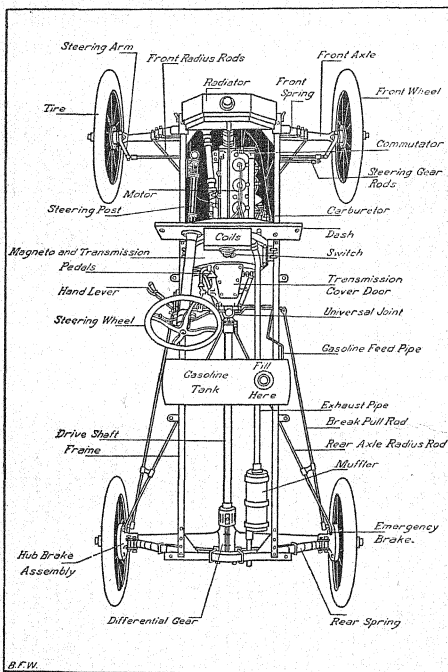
The Ford chassis, showing location of important parts of the mechanism
